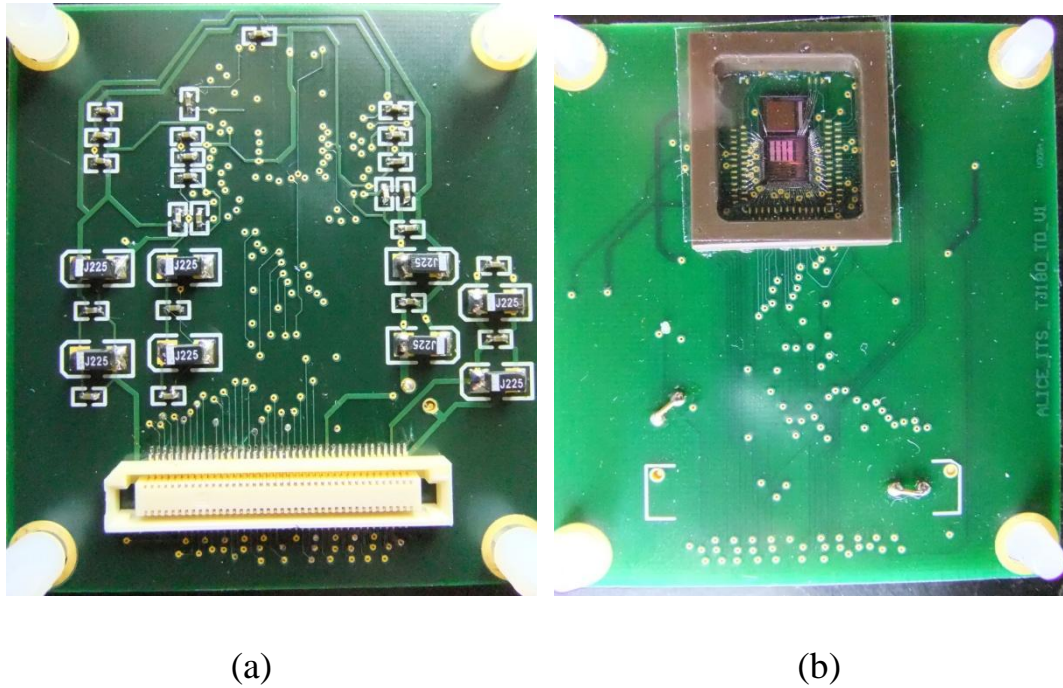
Photo of the SEUPCB chip board with all the placed elements and bonded SEU chip: a) Bottom side view; b) Top side view.
